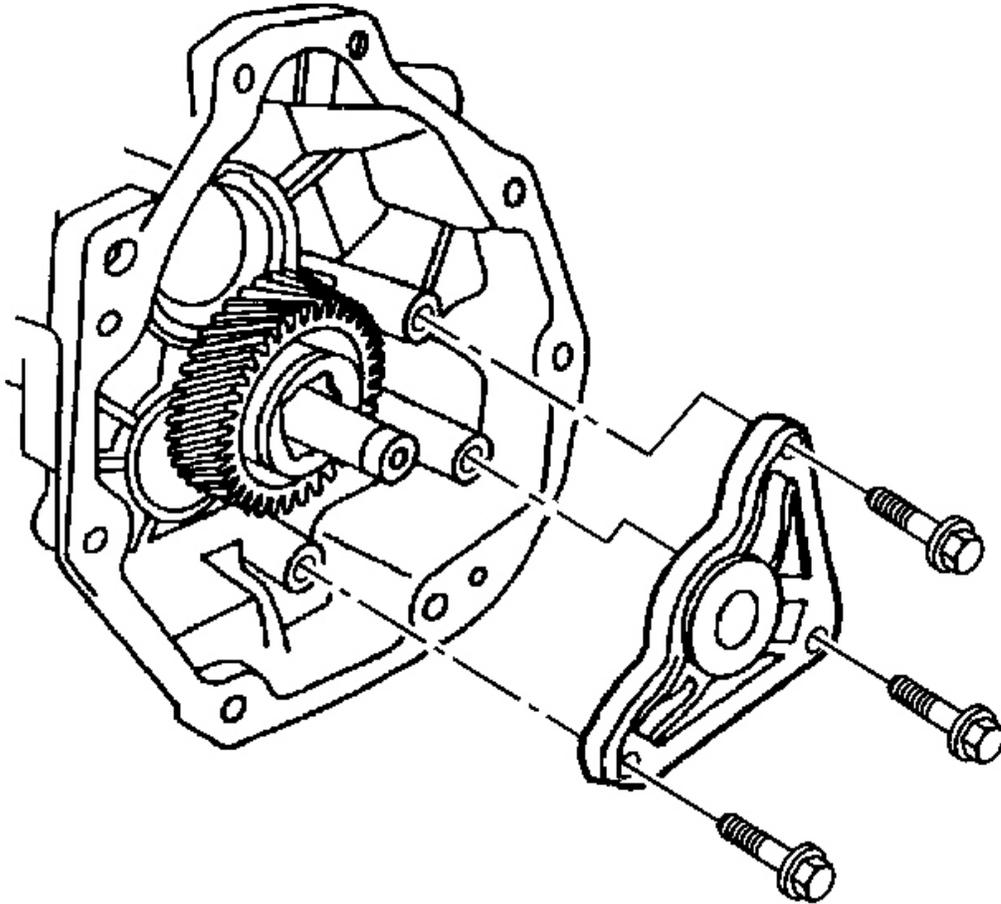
View Of Reverse Idler Shaft Bracket & Mounting Bolts
